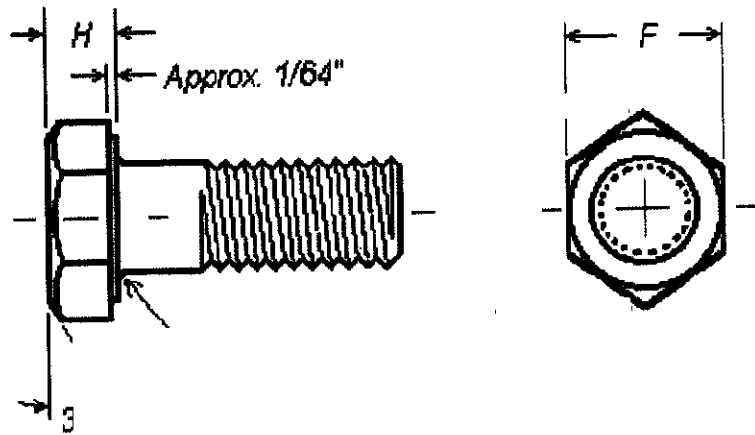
Nominal diameter of bolts and dimensions of head bolt (Kalpakjian, 2000)
